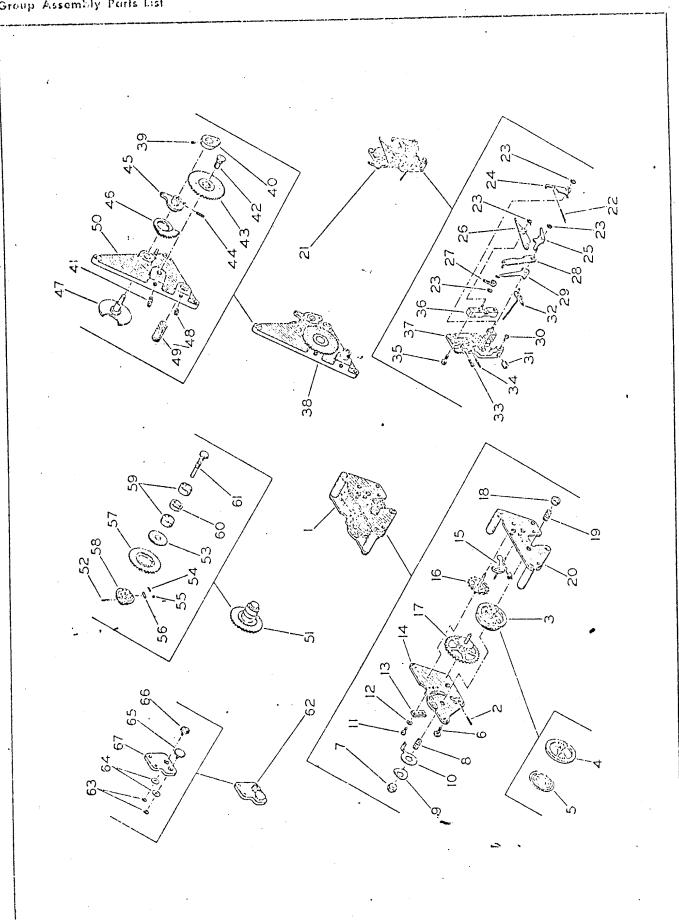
Clock Mechanism, Control Unit, Plate, Shaft and Clutch, Diai Plate and Gear Assemblins
